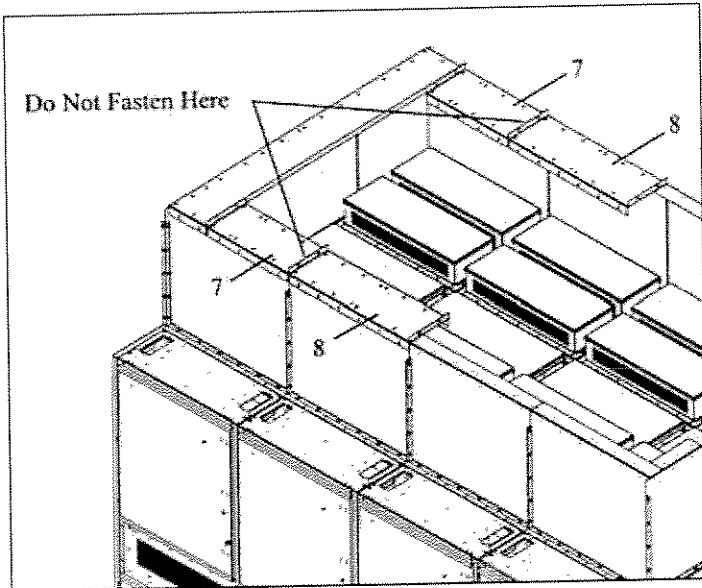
Middle Roof Extension Panel Installation - Beginning.
